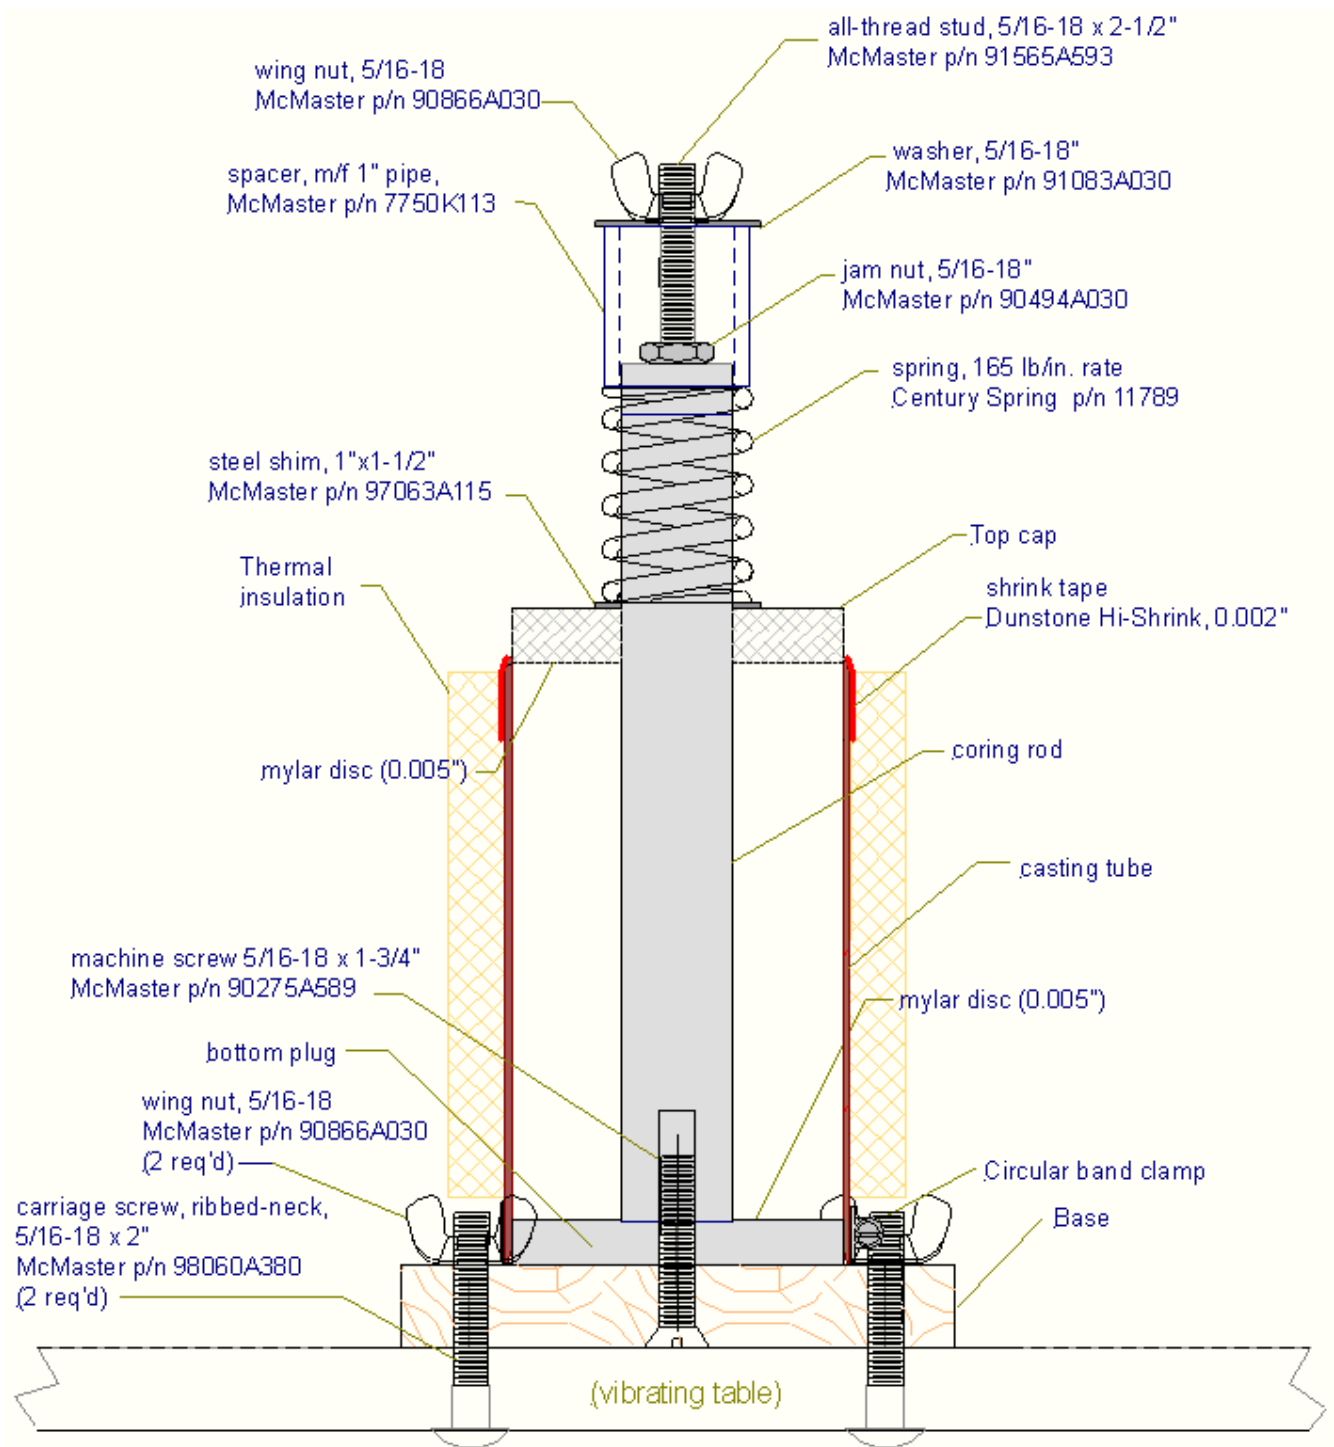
Casting apparatus set-up for clamping propellant during curing.
